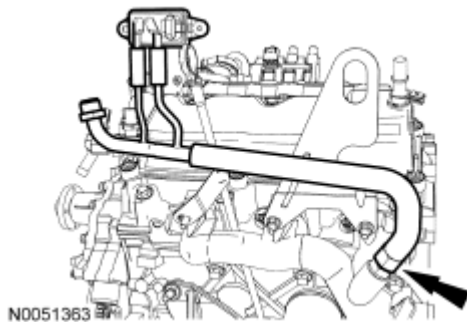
Locating Exhaust Manifold-To-EGR Valve Tube
